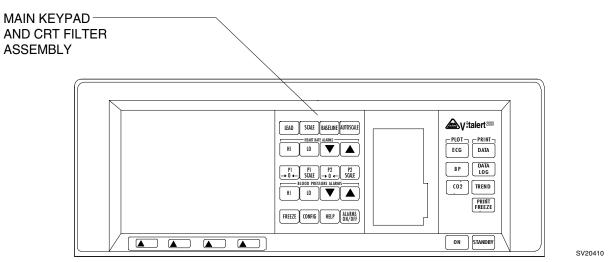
REPLACEMENT OF MAIN KEYPAD AND CRT FILTER ASSEMBLY
